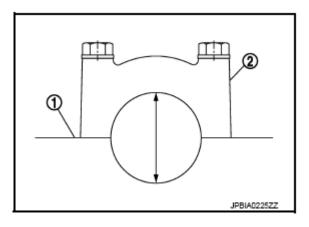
Measuring Inner Diameter Of Main Bearing Housing Using Bore Gauge Courtesy of NISSAN NORTH AMERICA, INC.
